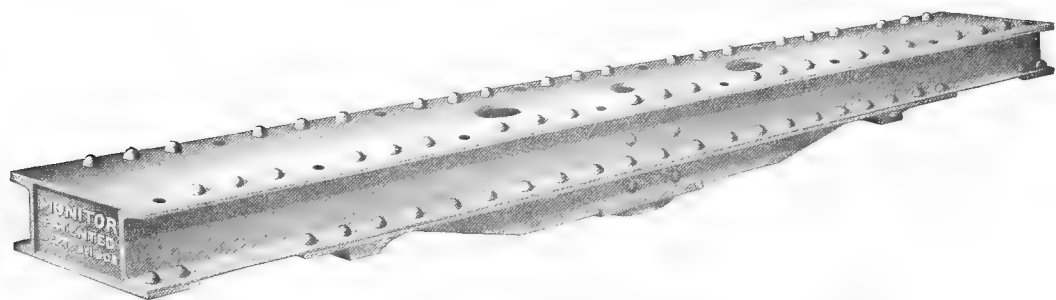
Monitor Body Bolster. Chicago Railway Equipment Company.
